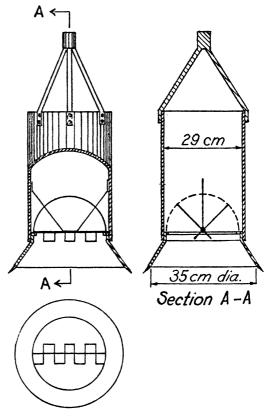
A valve auger designed by Doctor Hamilton in Java.
